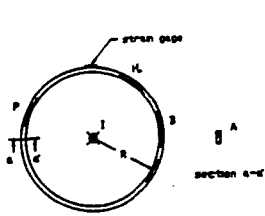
Closed steel ring with secondary welding circuit
